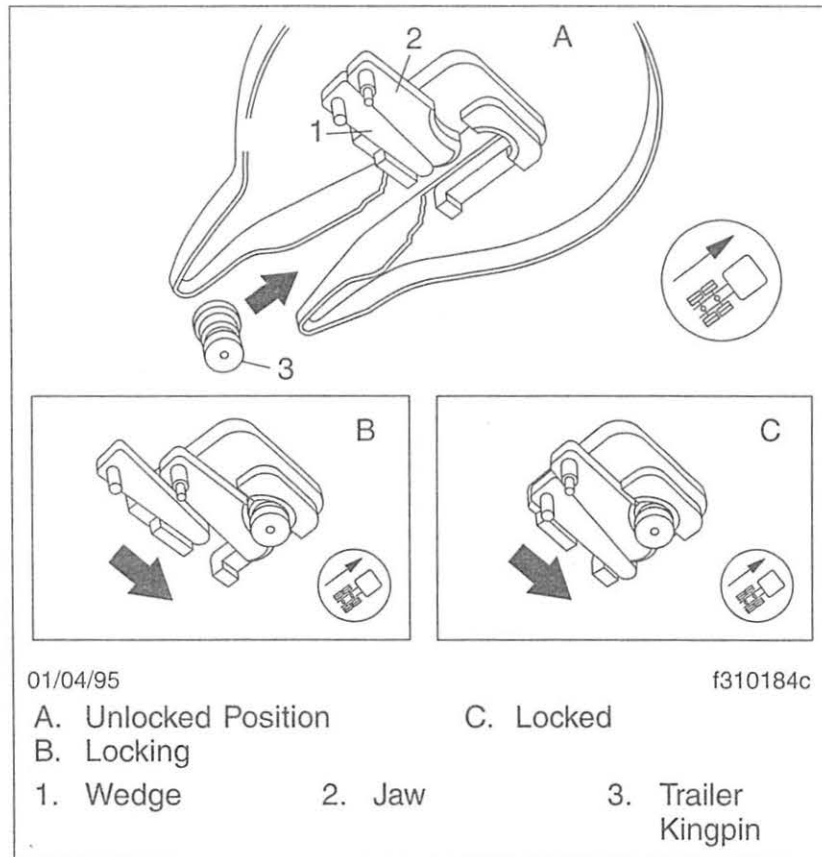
, Fontaine Kingpin Lock Mechanism
